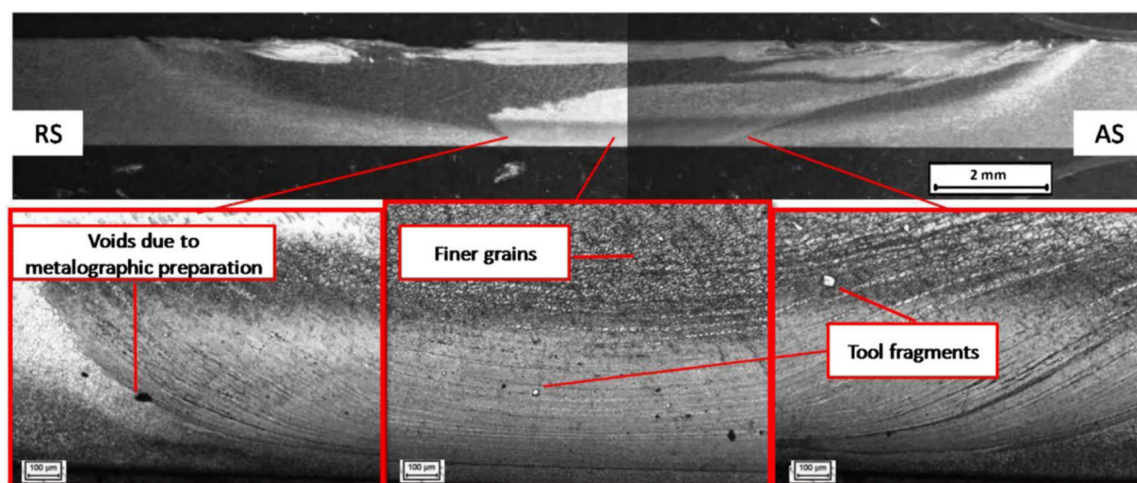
Structure of titanium alloy Ti-6Al-4V after friction stir welding with a tungsten carbide tool. Reprinted with permission from [377] 2013, Elsevier.
